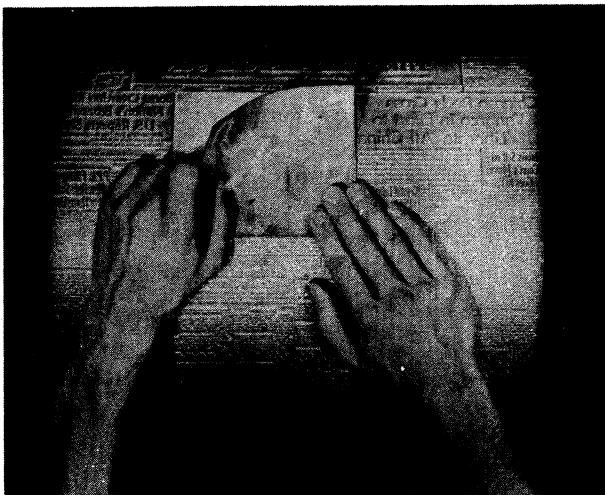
Mounting Engraved Plate on Cylindrical Stereotype for Direct Printing.
